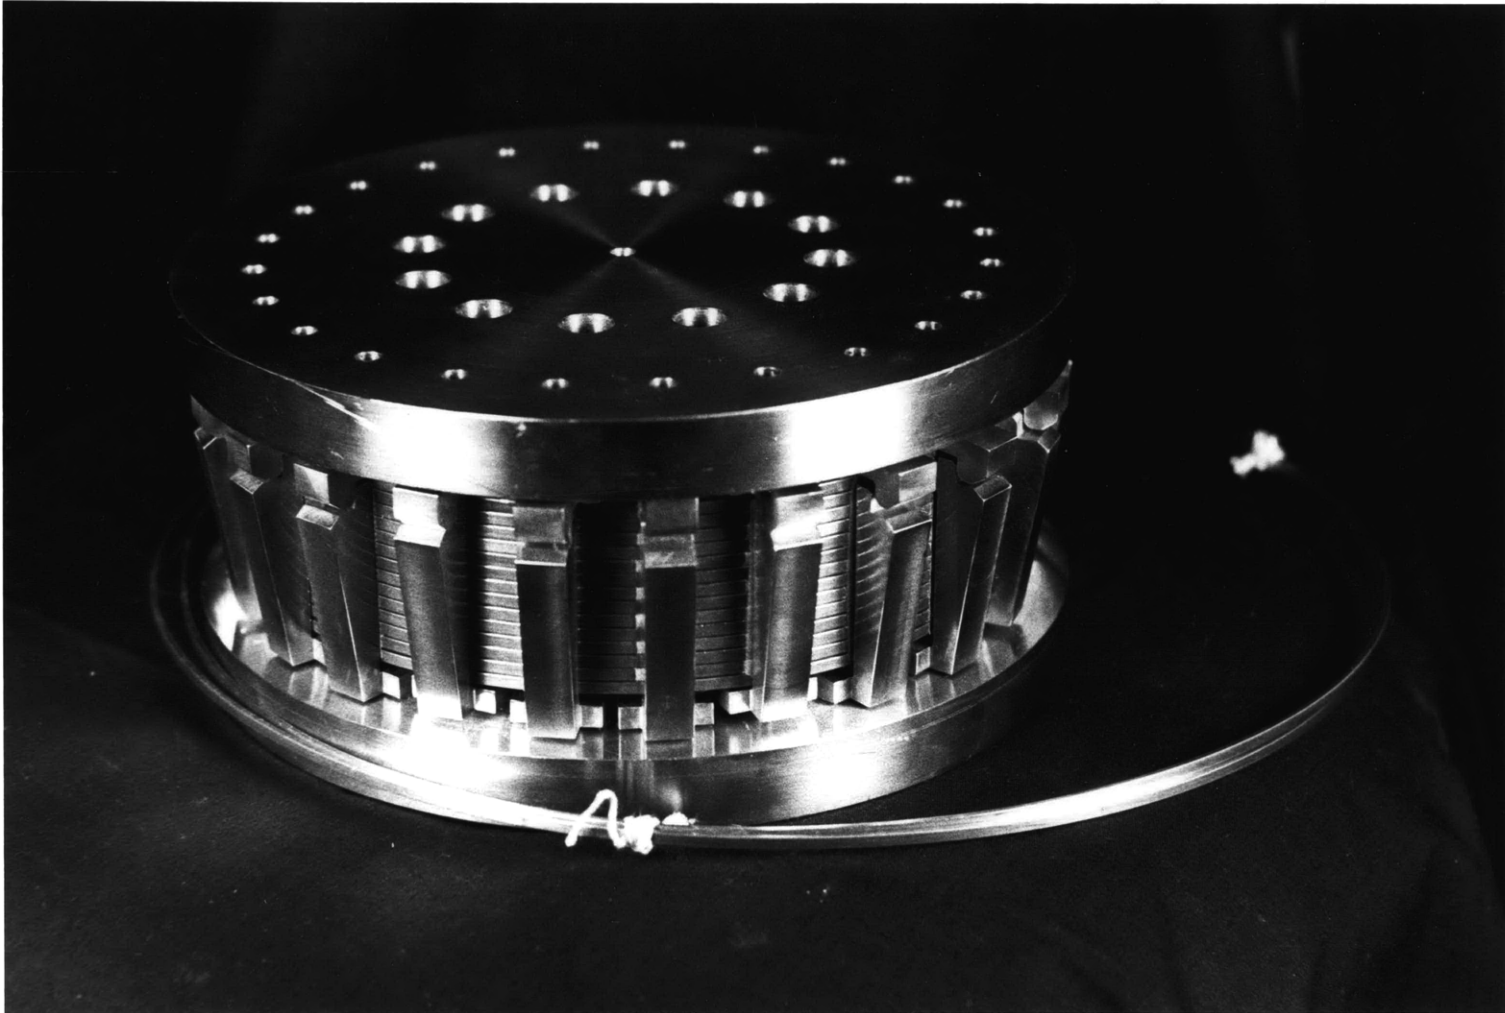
The coil is loosely fitted to the structure and prepared for welding. Note the weld preparations between the yoke bottoms and yoke tops.
